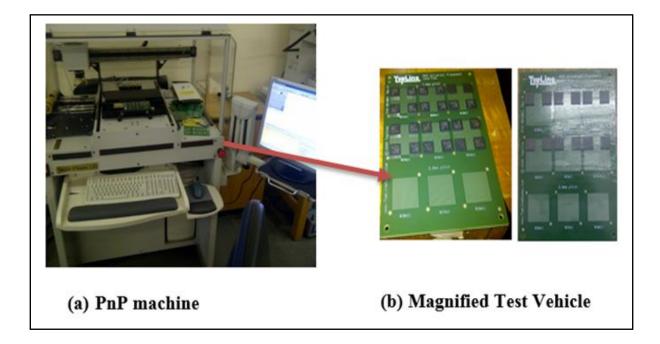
(a) PnP machine (b) Enlarged test vehicles after the component placement.
